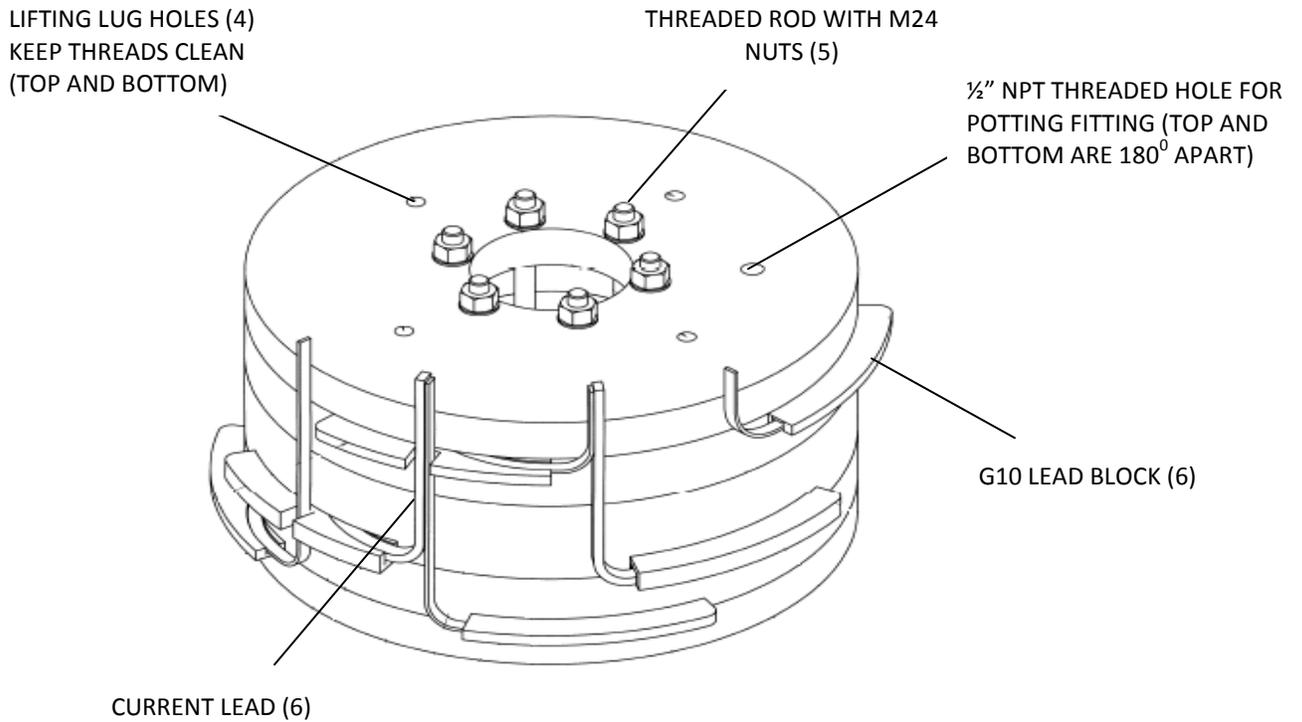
Al Stabilized NbTi coil test magnet global assembly isometric drawing
